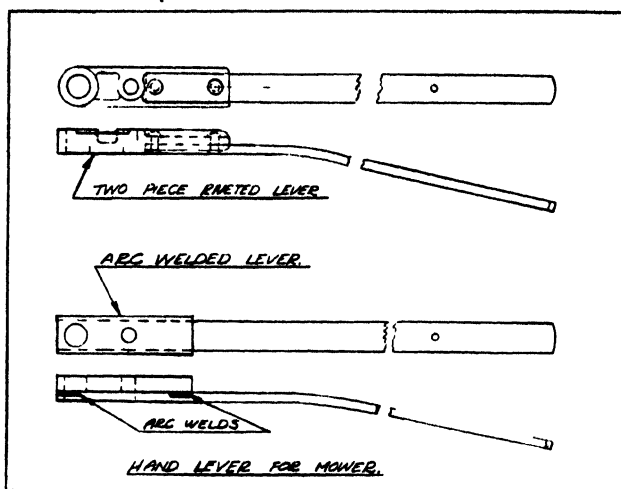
Hand lever—riveted (above) and arc welded (below).
